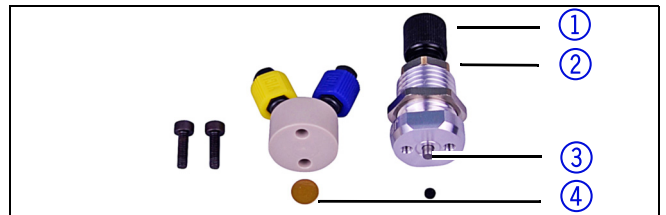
Disassembled Back-Pressure Regulator, stamp outside
